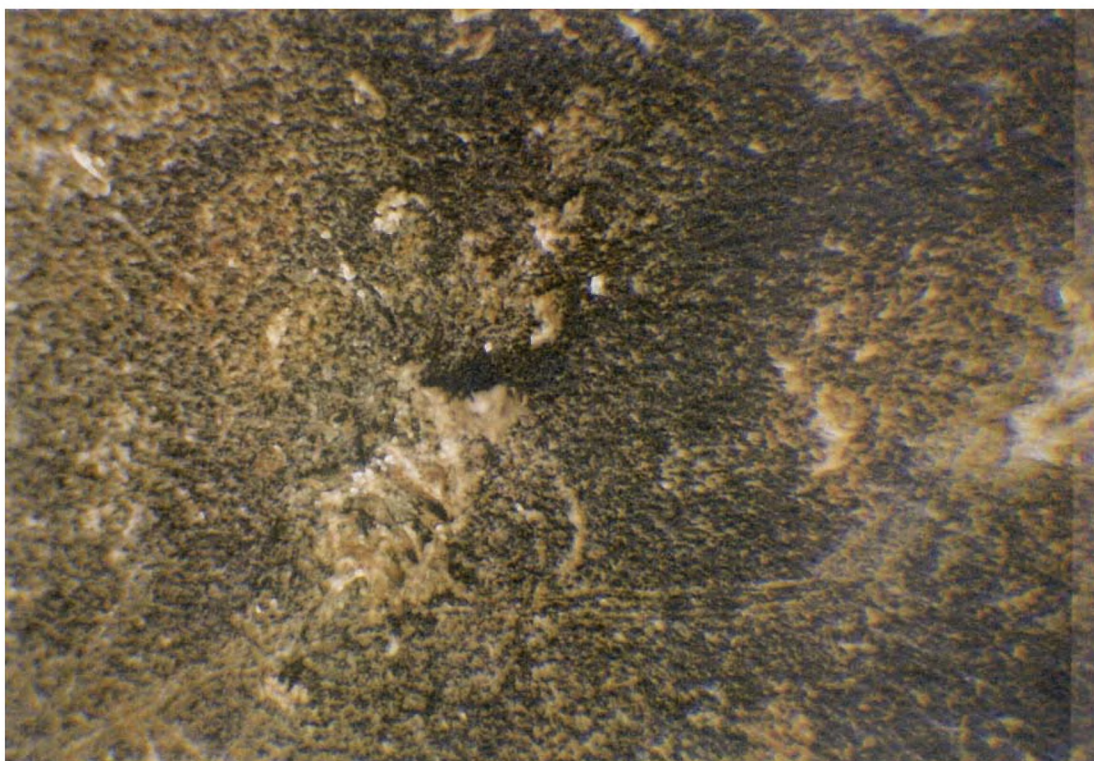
Carborundum Grinding Wheel with what appeared to be steel inner area.
